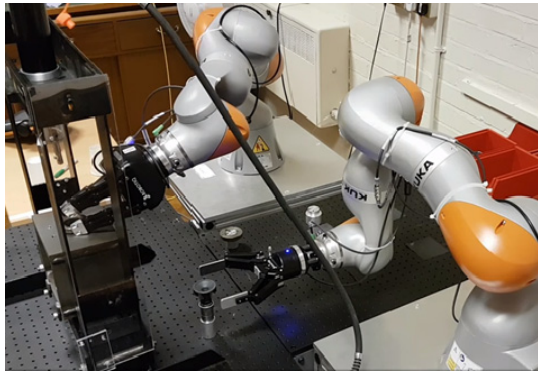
HRC disassembly of the water pump using two collaborative robots.
